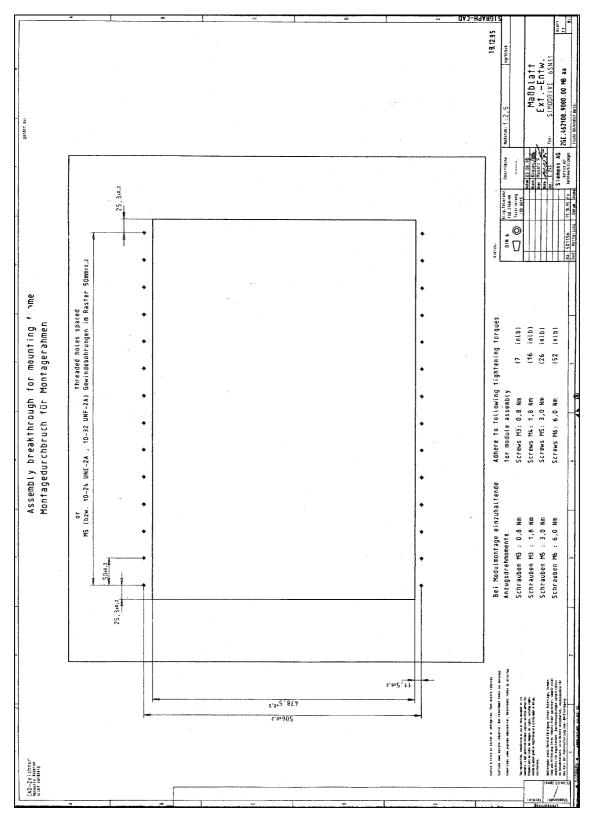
External cooling, mounting break-through for the mounting frame
